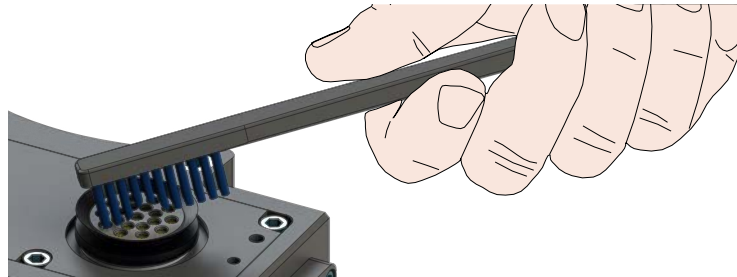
Inspect Master and Tool Pin Blocks
